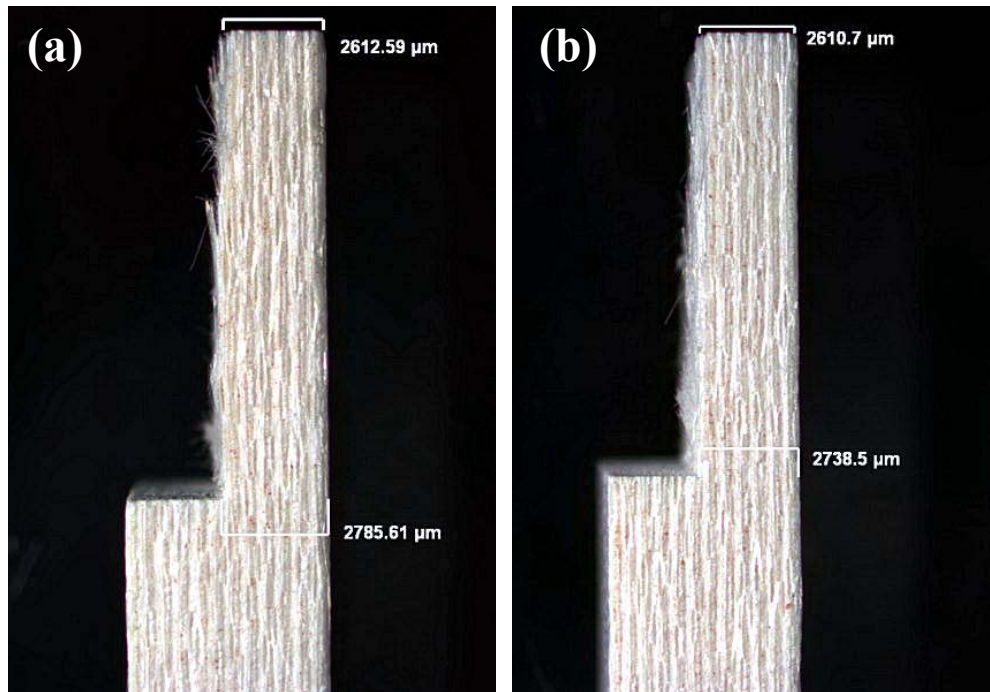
Side views of fracture surfaces of N720/A specimen tested in creep at -6.5 MPa at 1200 °C in air. (a) is of piece A. (b) is of piece B.
